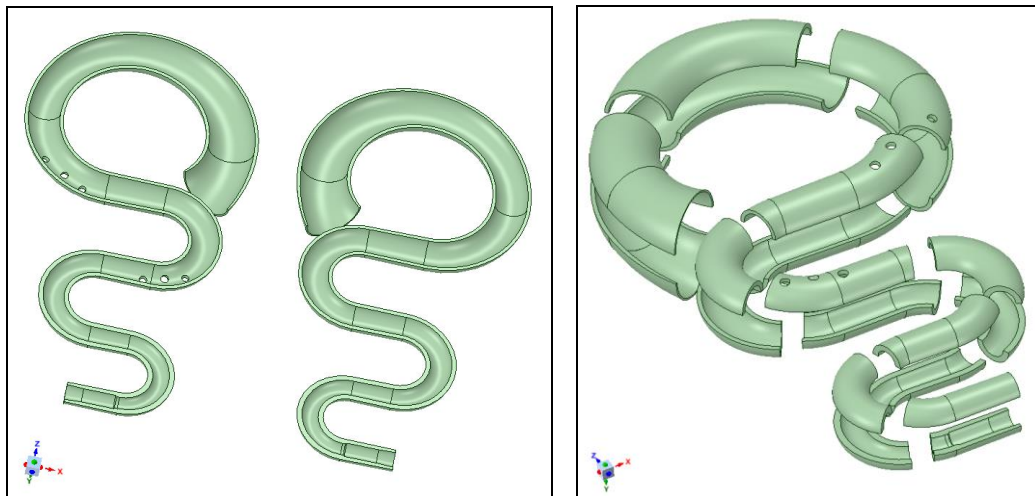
The Dittes serpent sliced for CNC milling: halved, left; segmented, right.
